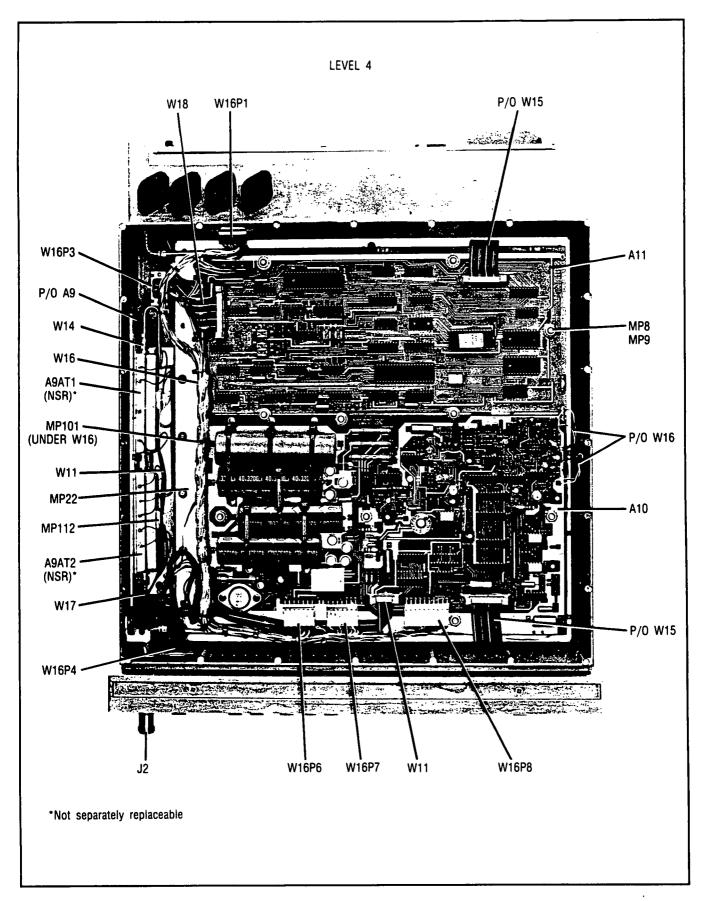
(2511A and above). Bottom Internal View; Bottom Cover Removed
